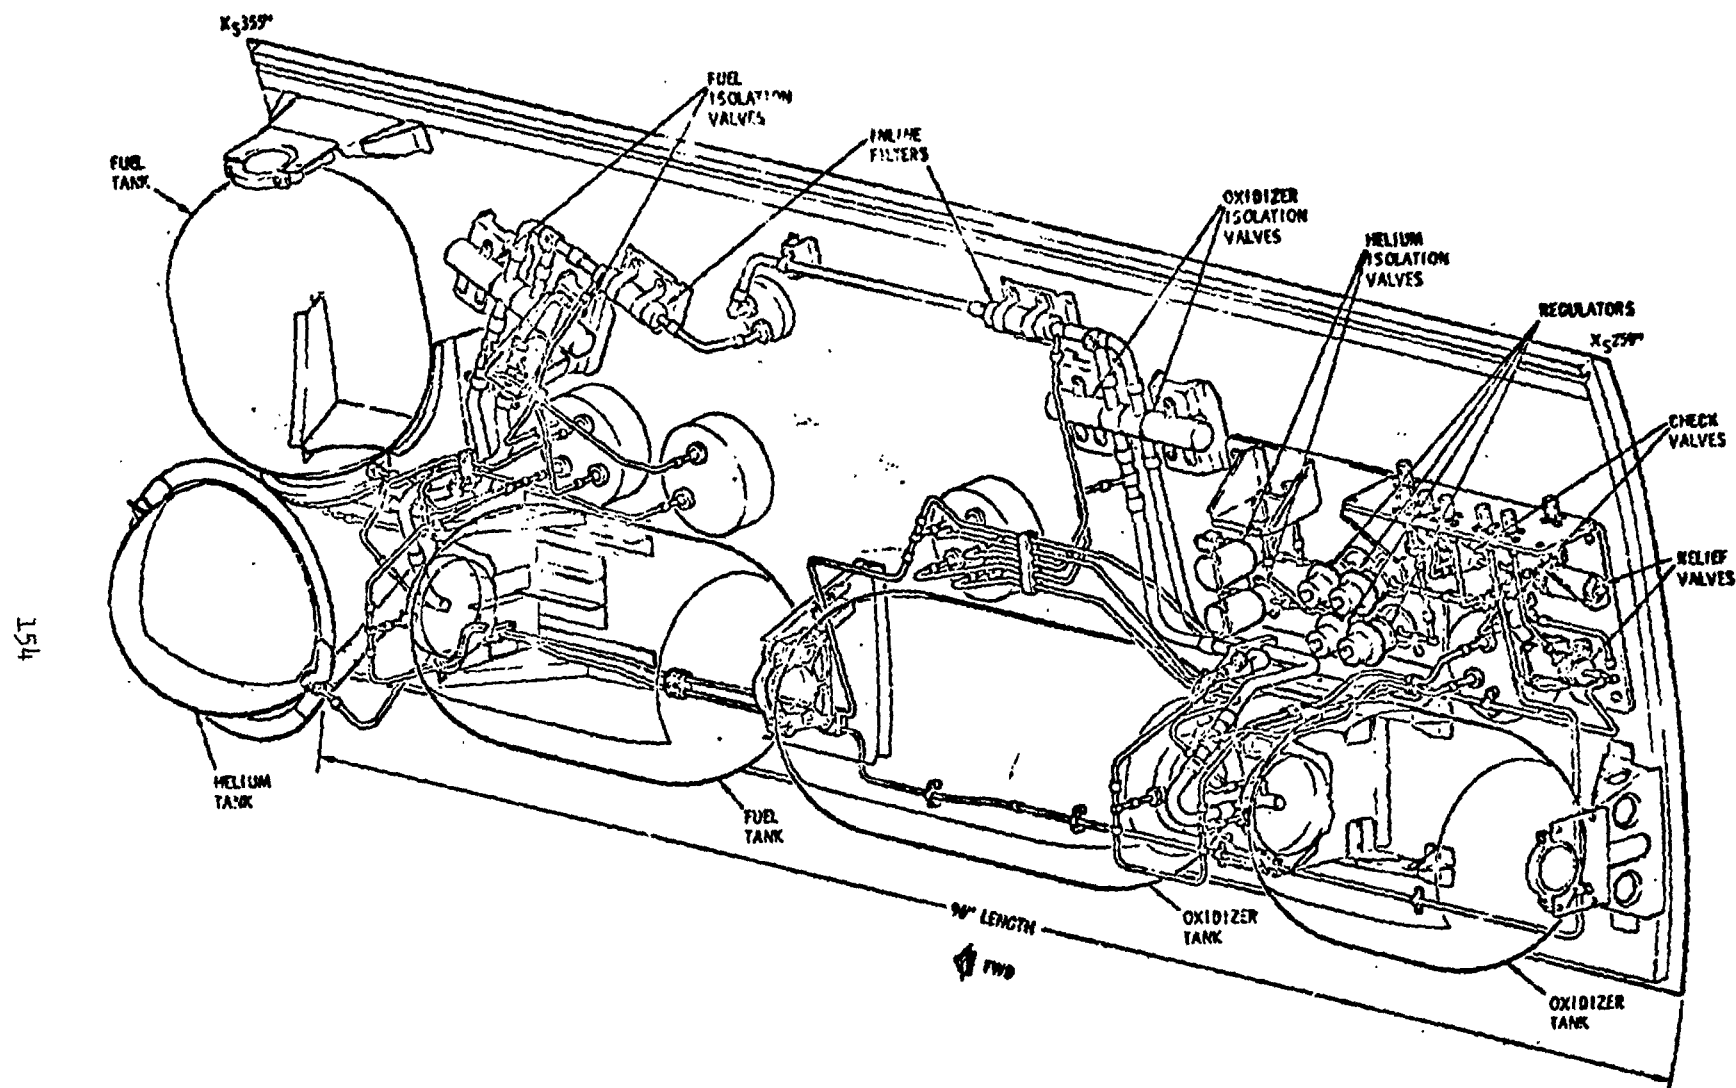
SM RCS PANEL ASSEMBLY QUADS A AND C.
